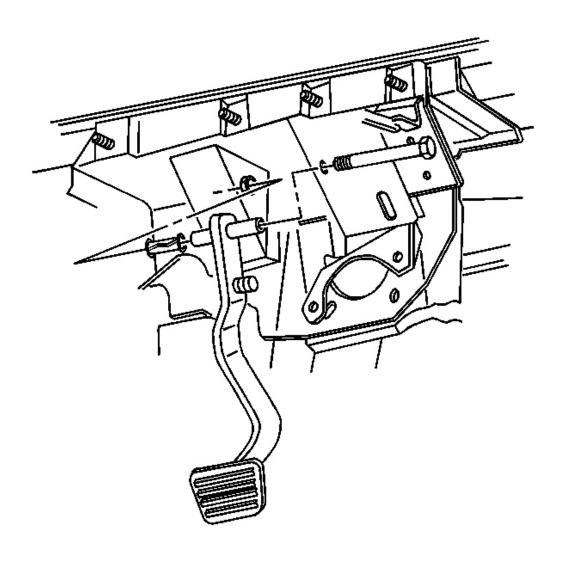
Brake Pedal And Pivot Bolt Removed Courtesy of GENERAL MOTORS CORP.
